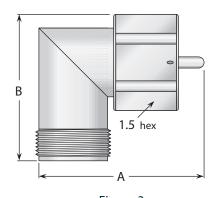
(Right angle plug-jack; connects one plug and one jack)
